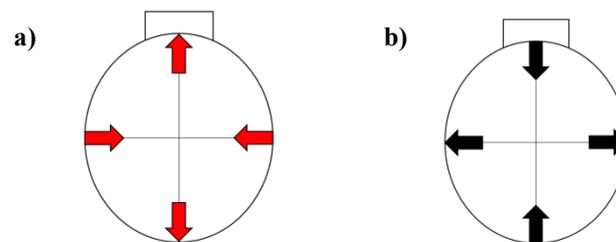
Direction of a) welding deformations on the pipe material during cooling, b) forces on the pipe material during expansion with an oval tool.
